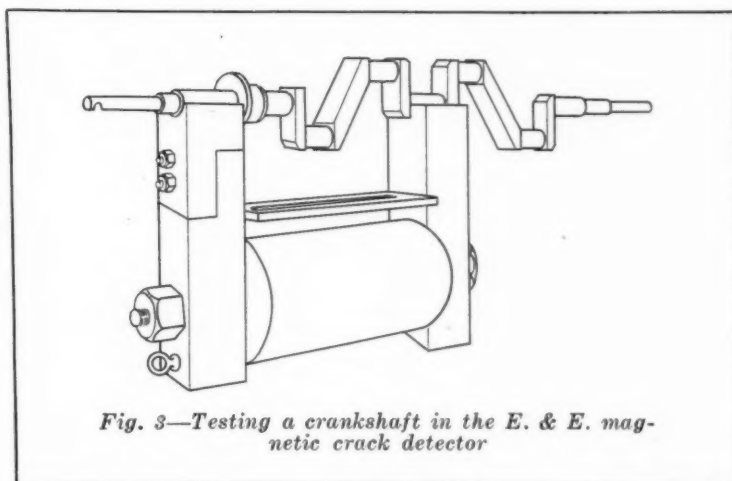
Testing a crankshaft in the E. & E. magnetic crack detector
